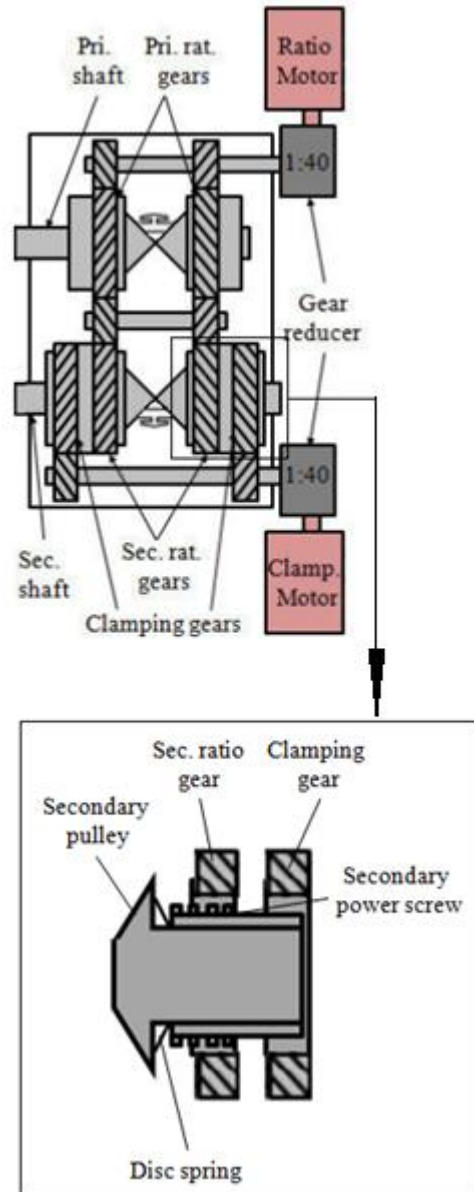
Clamping force mechanism in the EM CVT's secondary pulley assembly [4]
